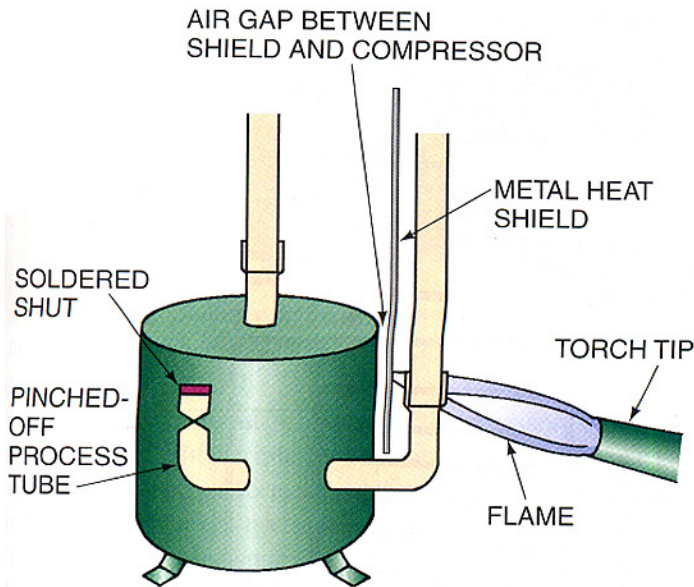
SAFETY PRECAUTION: A shield may be used to protect the surrounding components and cabinet from heat while soldering.
